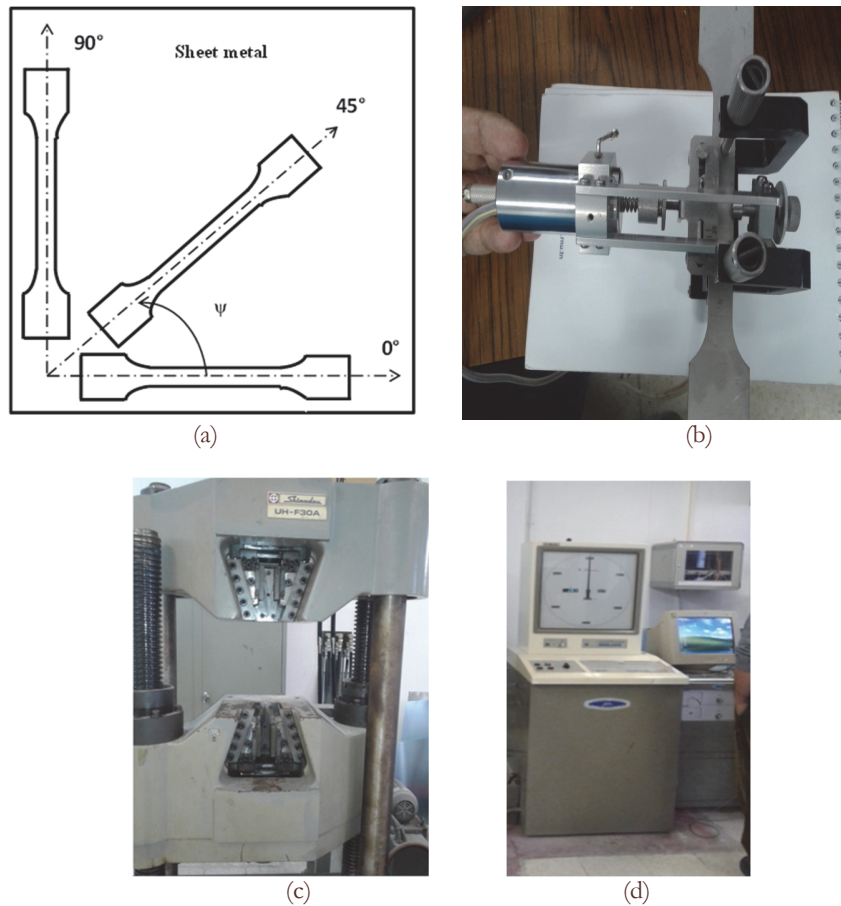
(a) Loading Direction of cutting (b) Electronic extensometer (c) Tensile test machine and (d) acquisition chain.
